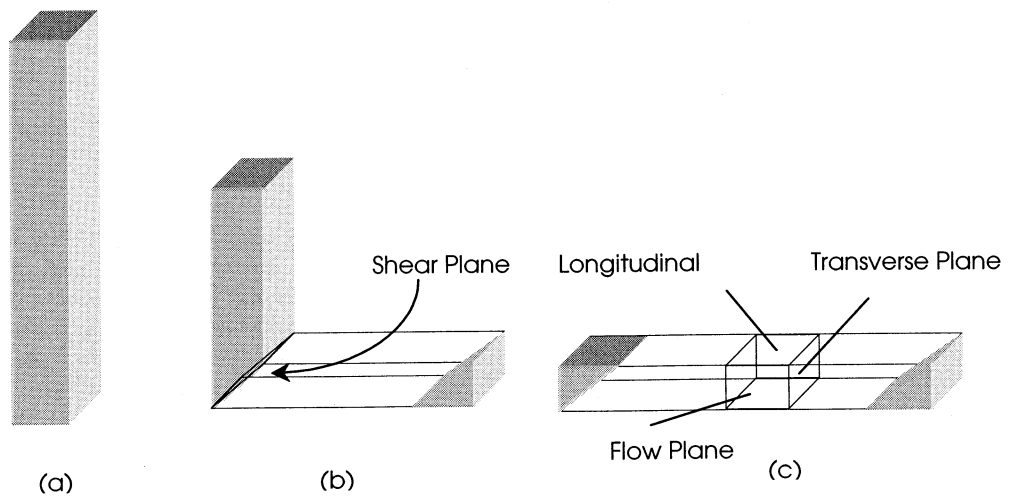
Illustration of workpiece geometry during equal channel angular extrusion through a 90° die: (a) initial position, (b) intermediate position (c) one pass complete. Flow (front face), longitudinal (top face), shear and transverse planes are shown. The shaded end regions are undeformed.
